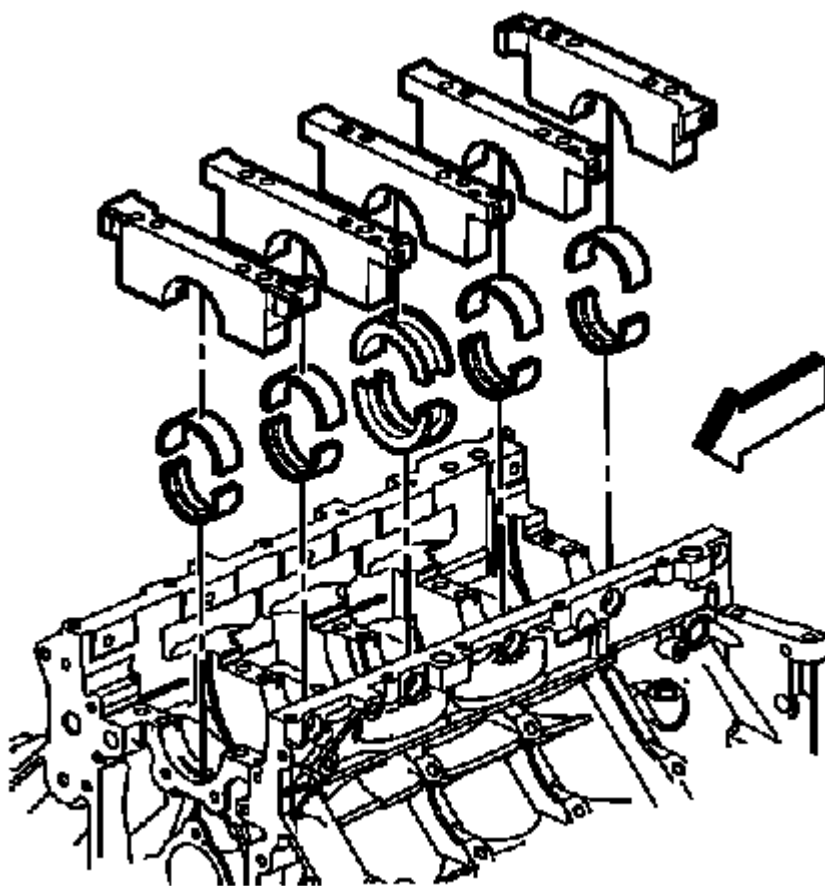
View Of Crankshaft Bearings & Bearing Caps
